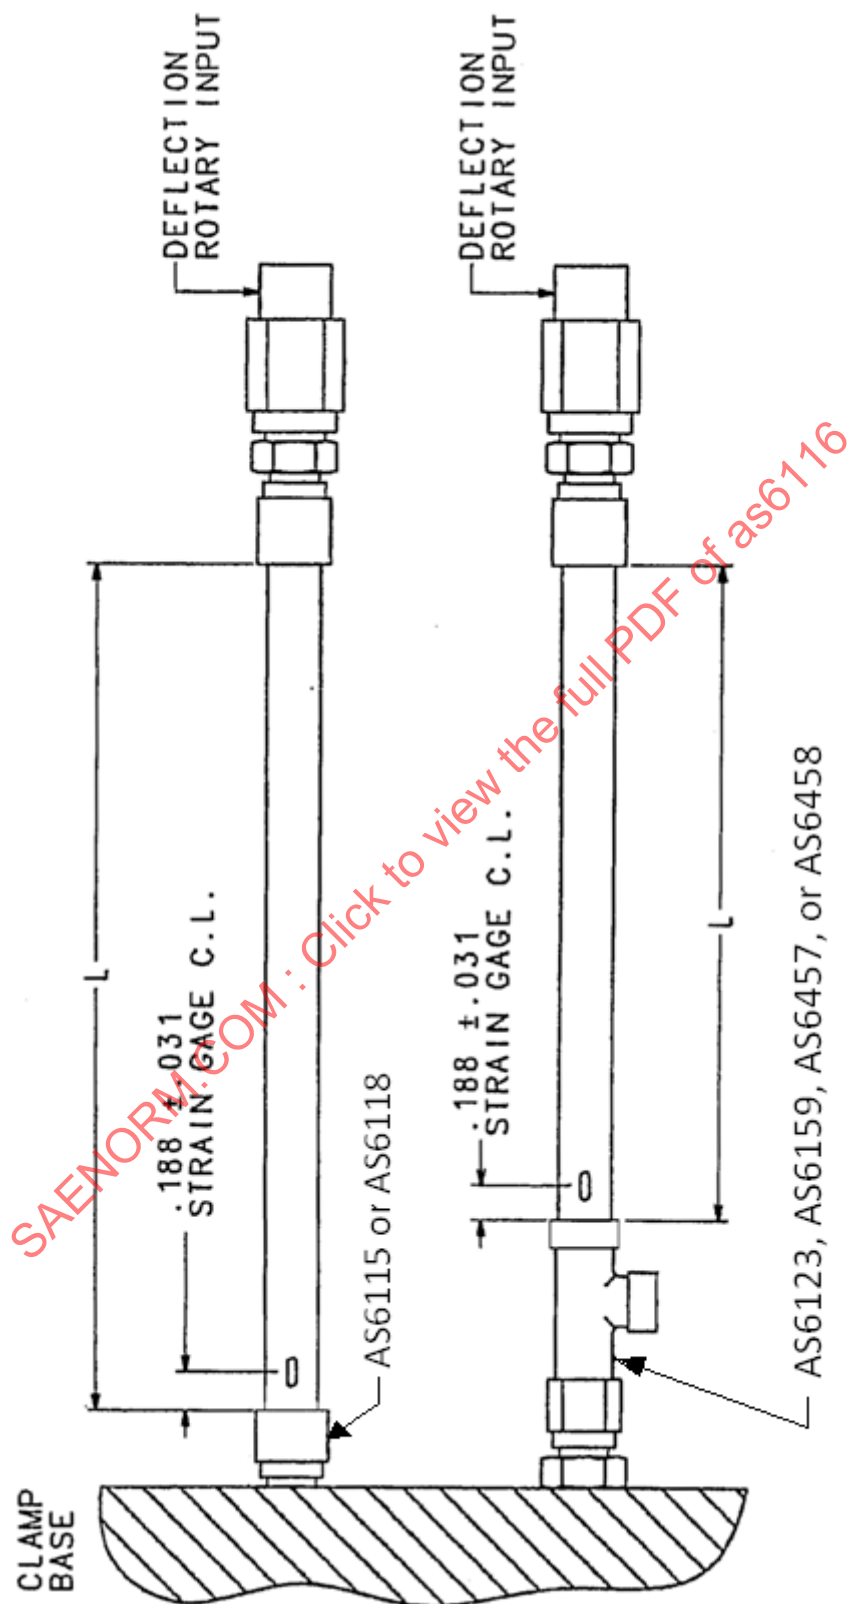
ROTARY FLEXURE TEST SPECIMEN
